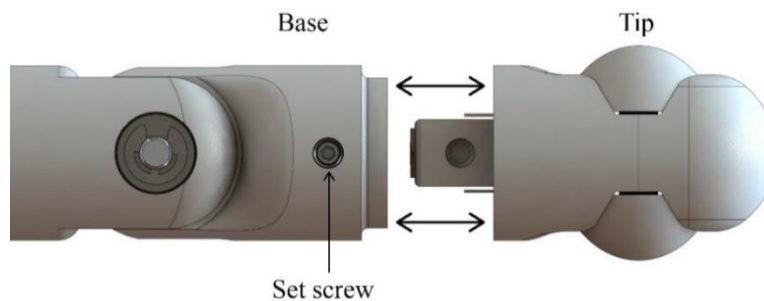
Finger/Base assembly method. The tip is inserted into an opening within the base, and fixed using set screws.
